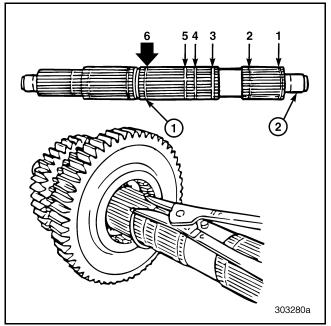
Installing Internal- and External-Toothed Thrust Washers (T313L/T318L Shown)
